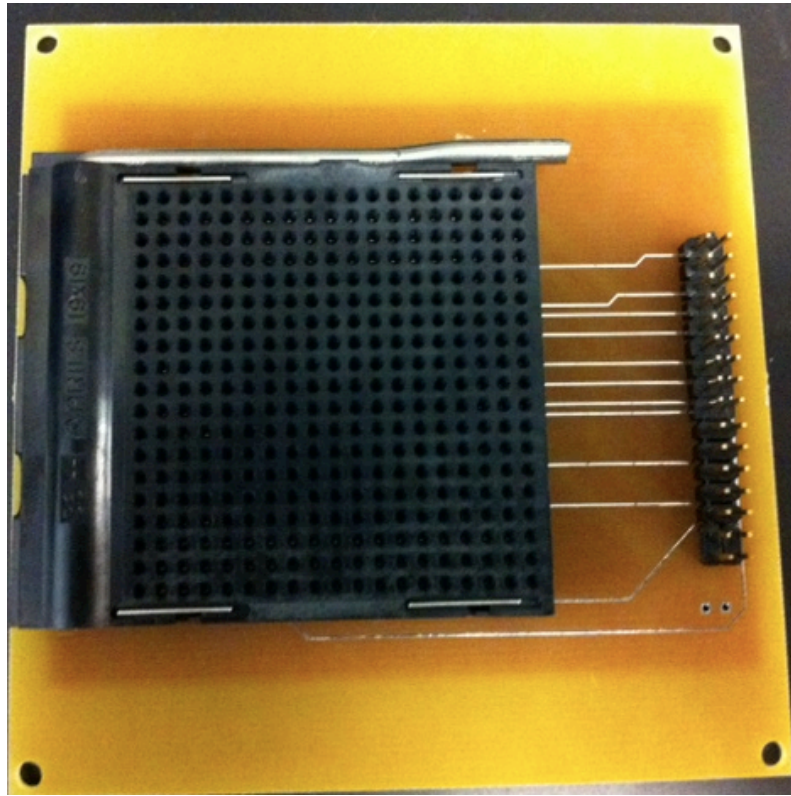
ZIF Socket Mounted on the fabricated PCB
